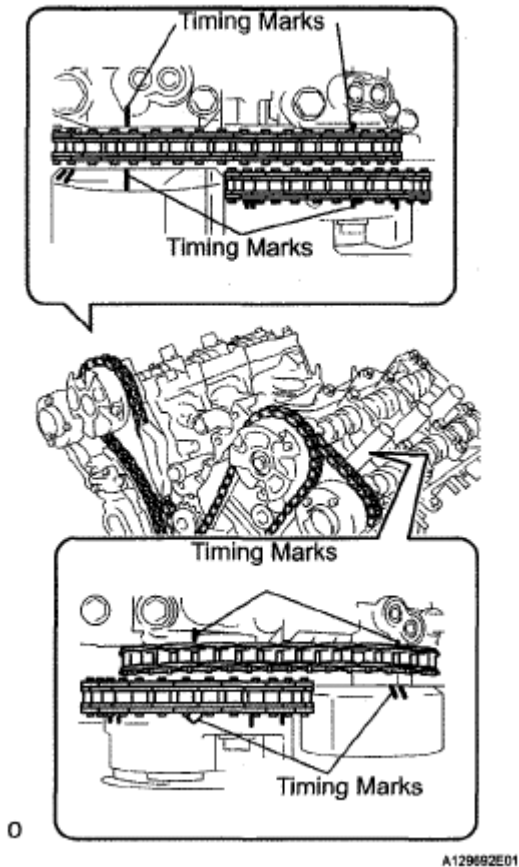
Identifying Timing Marks Of Camshaft Timing Gears
